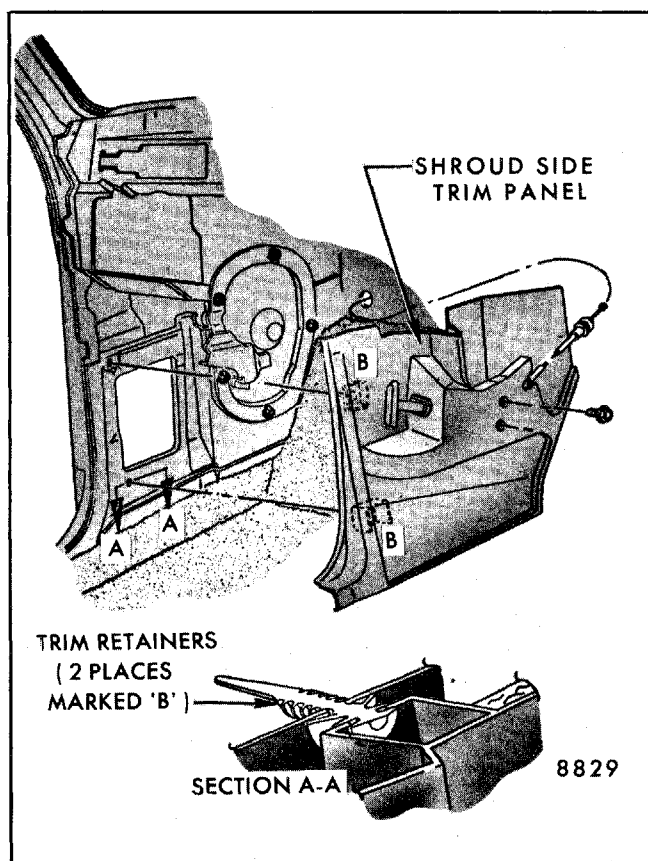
Shroud Side Trim Panel (Left Side)
